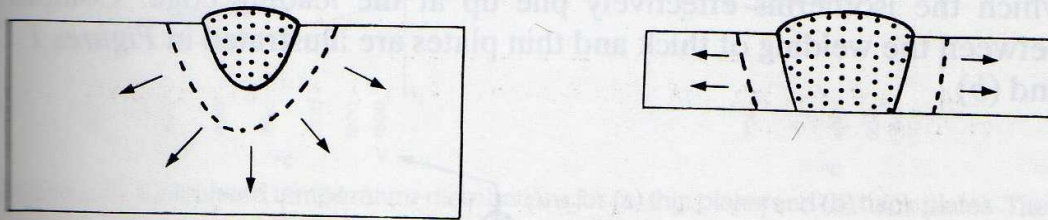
Three- and two-dimensional heat flow in welding.
